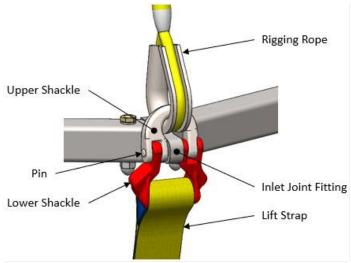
Sling Connector (Bucket Skin and Knuckle Covers hidden for clarity. Bushing not shown.)
